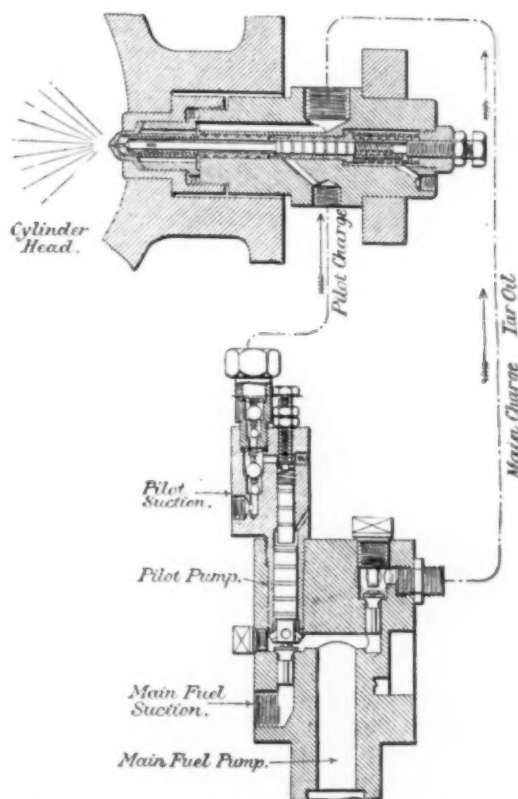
ATOMIZER AND DOUBLE FUEL PUMP, RUSTON AND HORNSBY HEAVY OIL ENGINE
